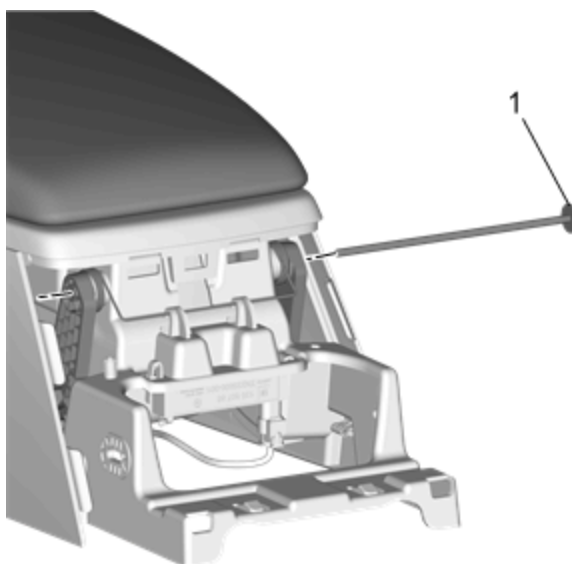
Front Floor Console Compartment Door Hinge Pin
